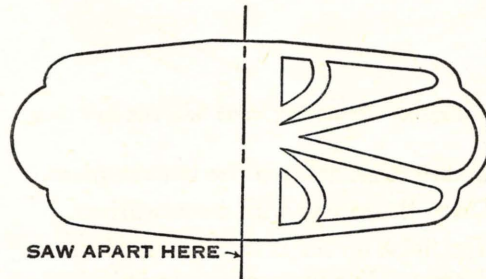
Both ends are laid out on one piece and completely formed before being sawed apart
